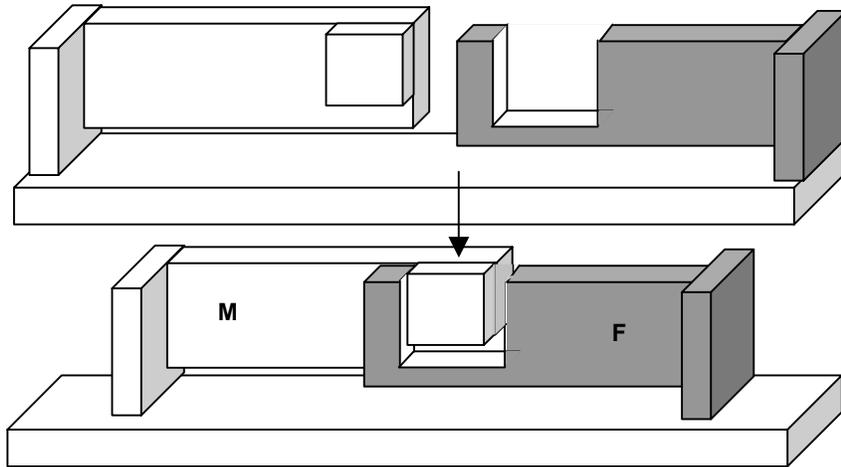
Laterally flexible clasp elements mounted on the surface of a connector and having their engagement area exposed for visual inspection from above (indicated by arrow). Upper sketch is before engaging, lower sketch is after engagement.
